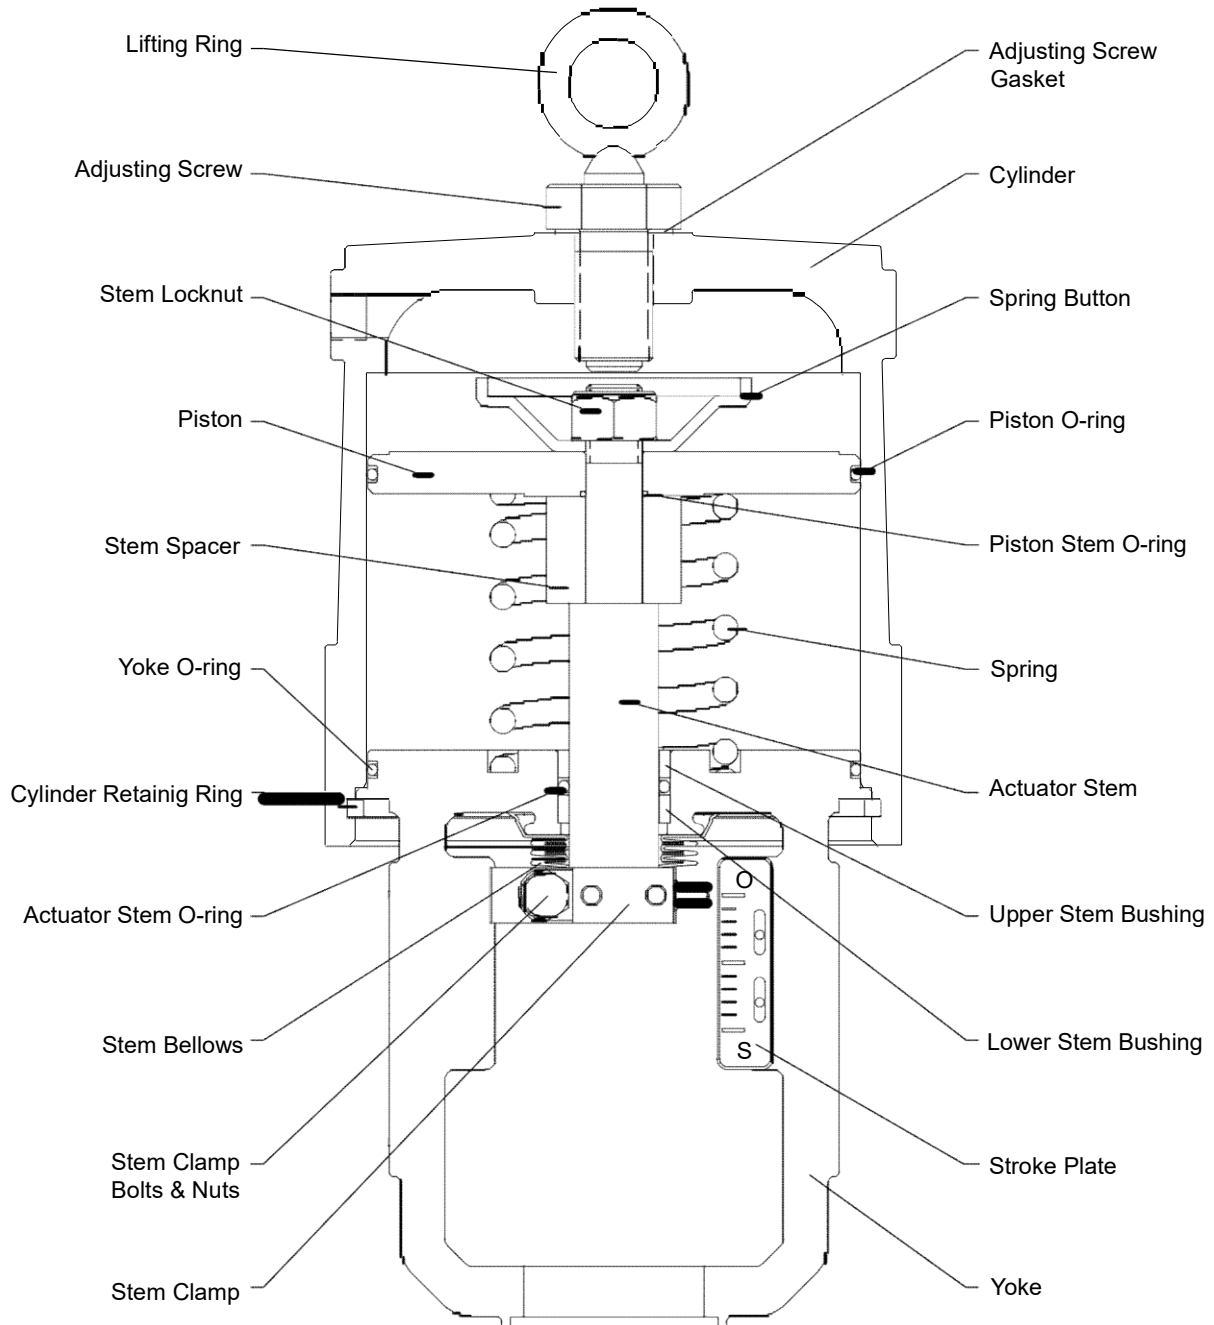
L-Act Spring-Cylinder Actuator (Air-to-Retract)
